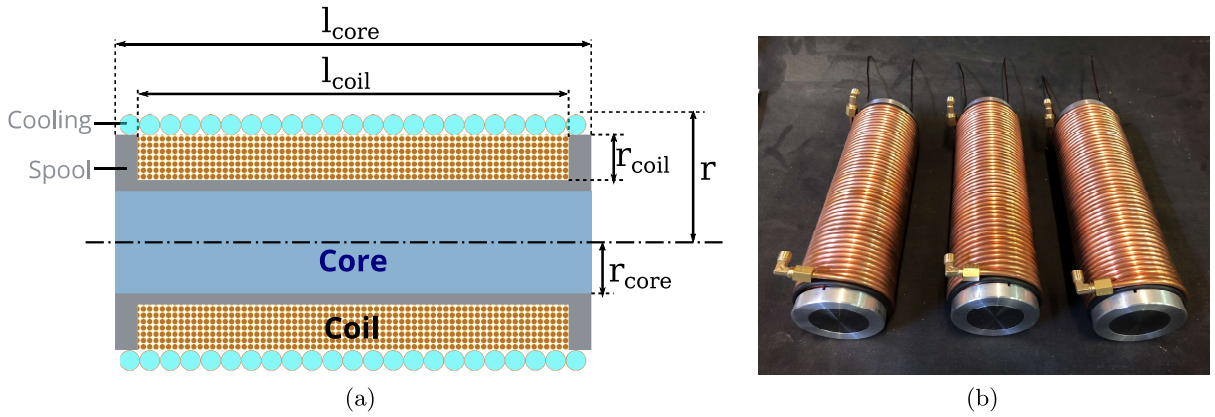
(a) illustrates the electromagnet shape, with its core, coil winding and its cooling part. The spool part allows containing the winding and to separate it from the core. (b) presents the implemented electromagnet prototype.
